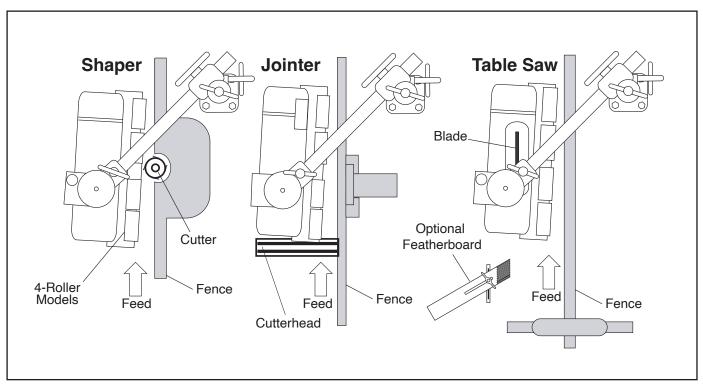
Typical power feed mounting on a shaper, jointer, and table saw.
